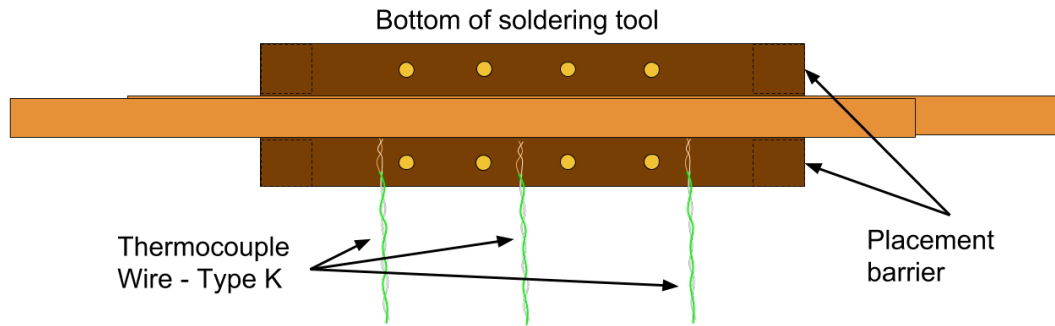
Illustration of a MgB₂ joint inside the soldering tool. The position of thermocouple-wires that are measuring temperature are also shown.
